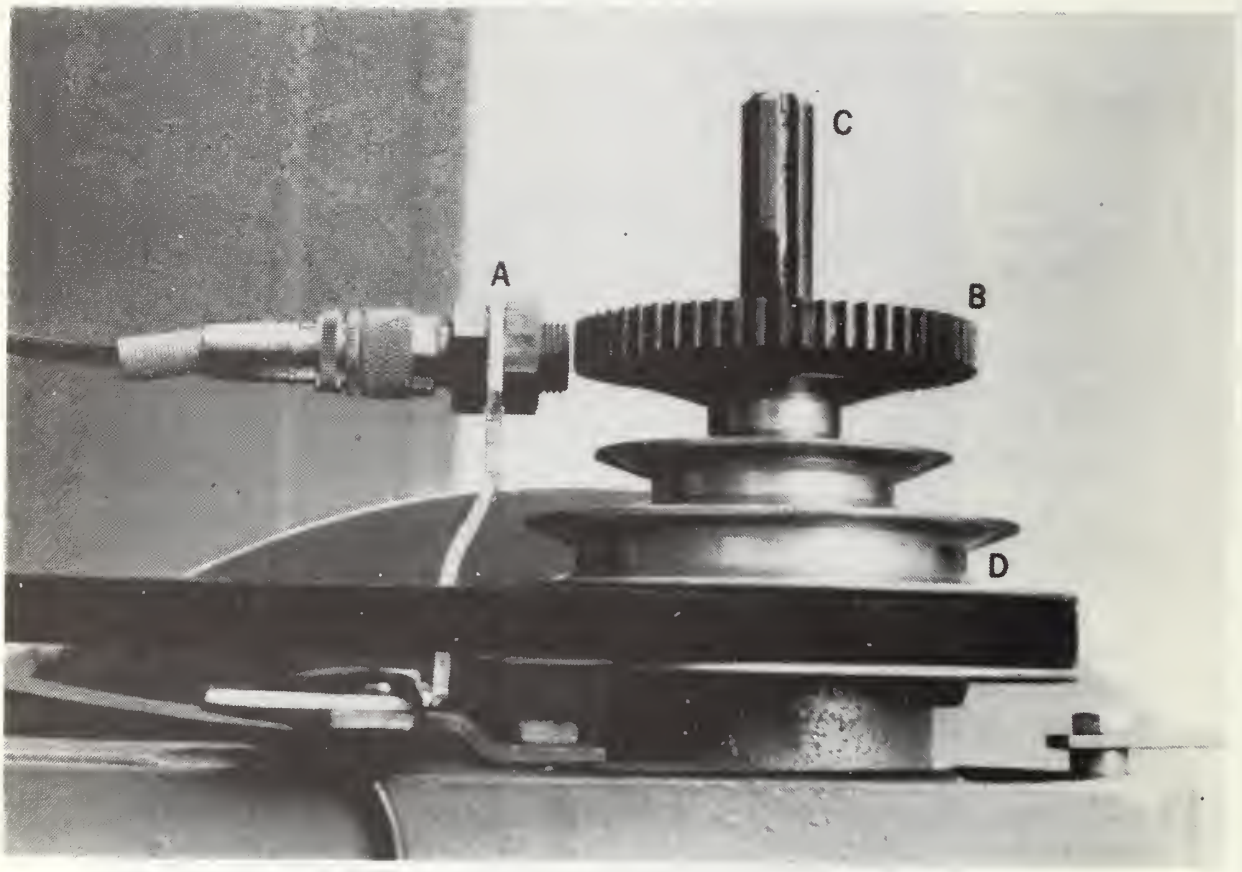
Drill spindle-speed instrumentation. Identified are the magnetic sensing coil (A) and the 60-tooth steel gear (B) mounted on the spindle shaft (C). One of the two stepped pulleys of the belt drive is shown at (D).
